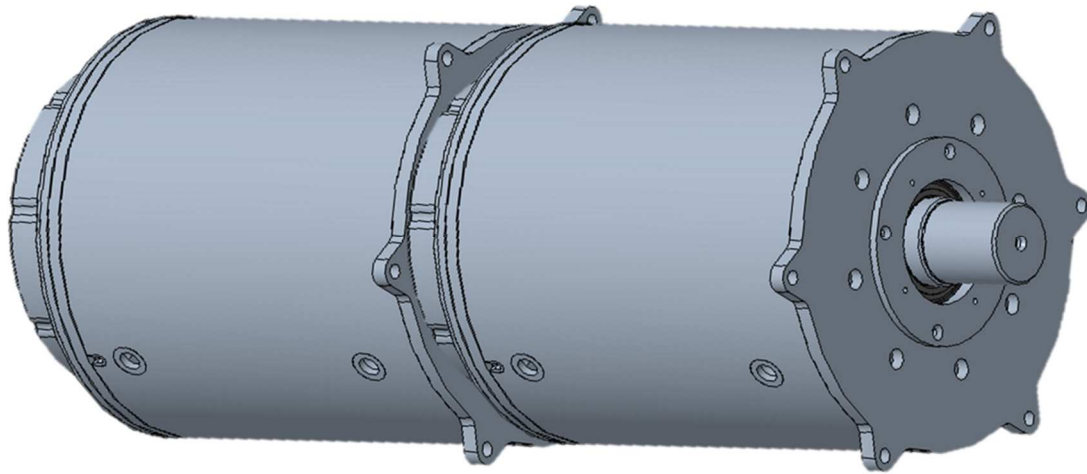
Mechanical design of the primary electric machine as a stacked version of two secondary electric machines
